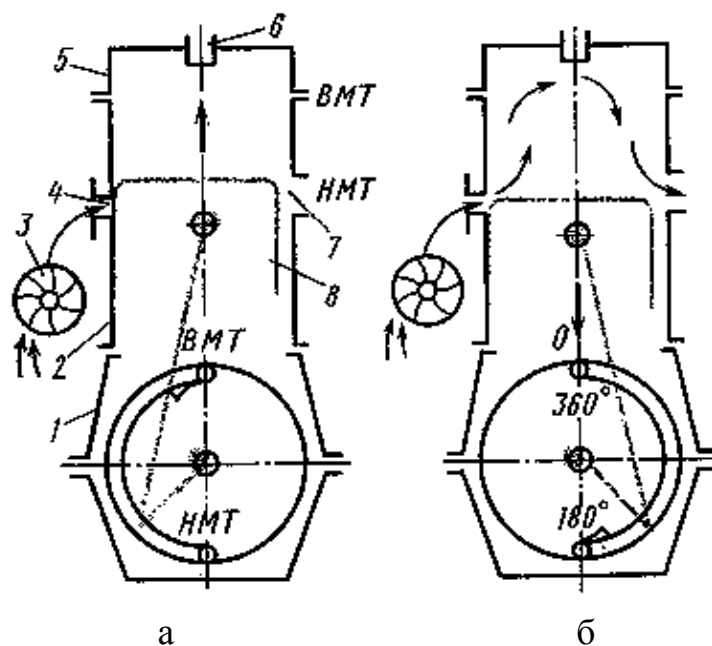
Two-stroke internal combustion engine: 1 - crankcase; 2 - cylinder; 3 - pump; 4.7 - purge windows; 5 - head; 6 - spark plug; 8 – piston
